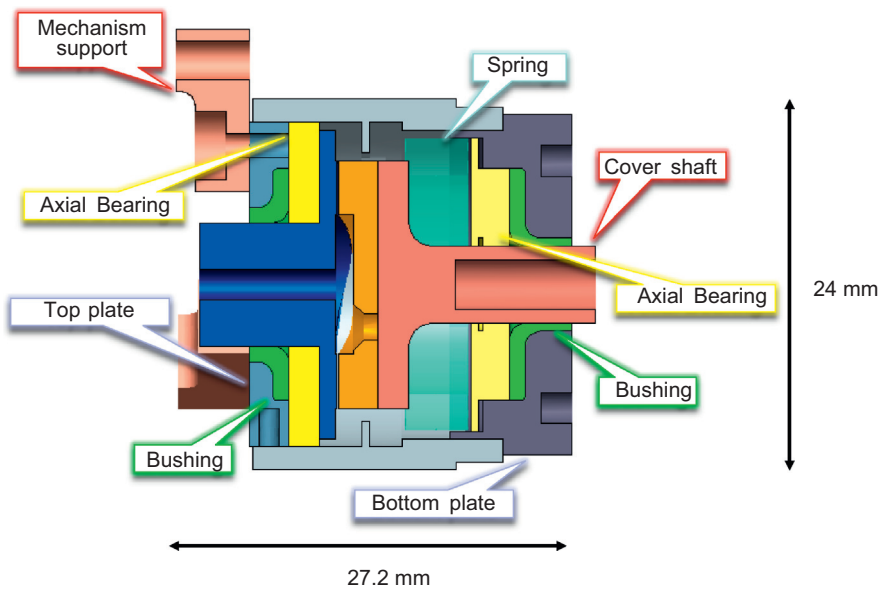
Picture of a mechanism section. Axial and radial dimensions are, respectively 27.2 and 24 mm.
